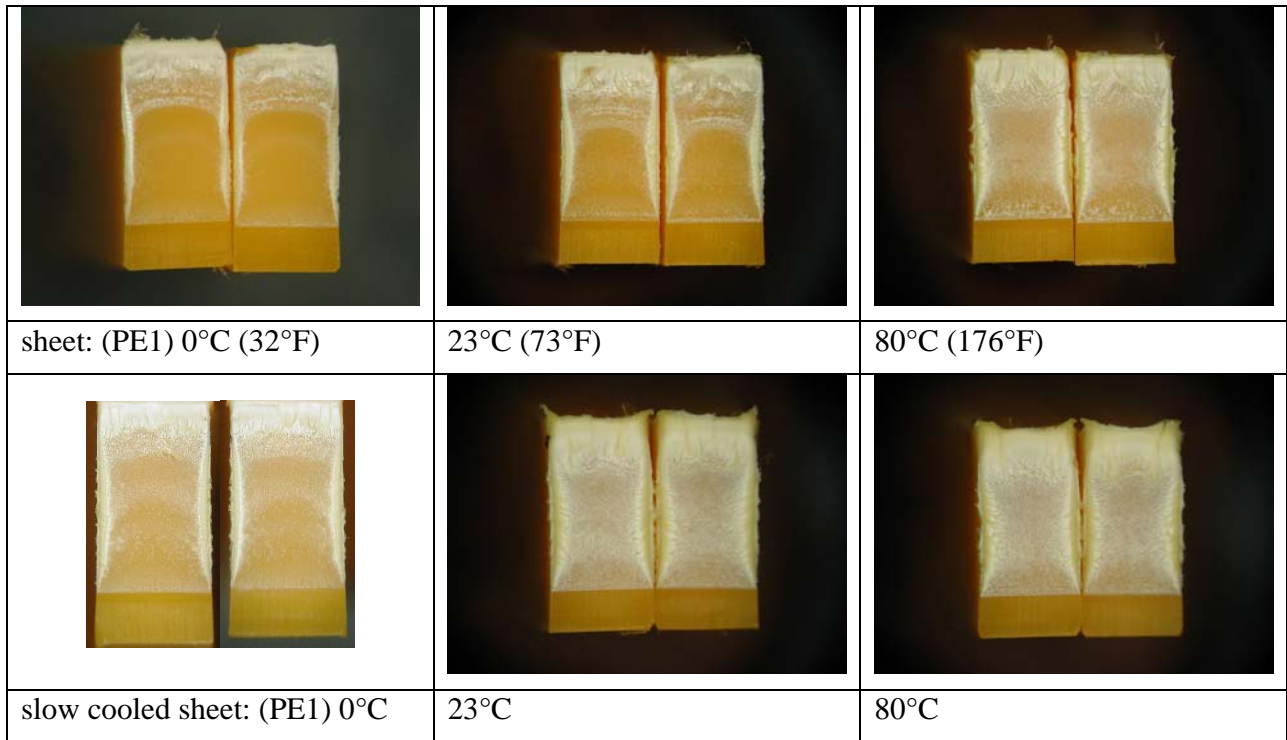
3PB fracture surface of PE1, sheet samples at 0°C, 23°C and 80°C
